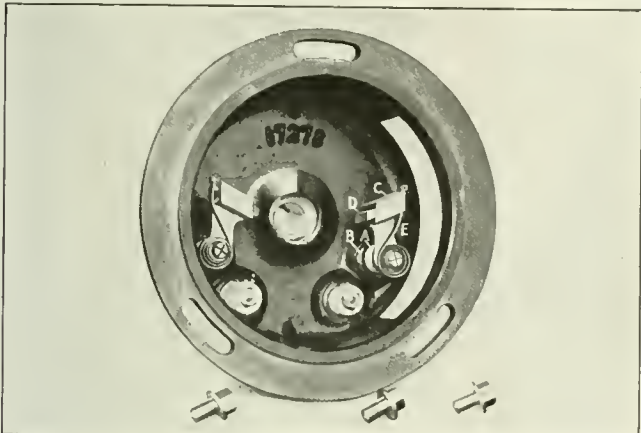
Enlarged Interior View of Motor-head, showing Brush Construction and Method of Securing
